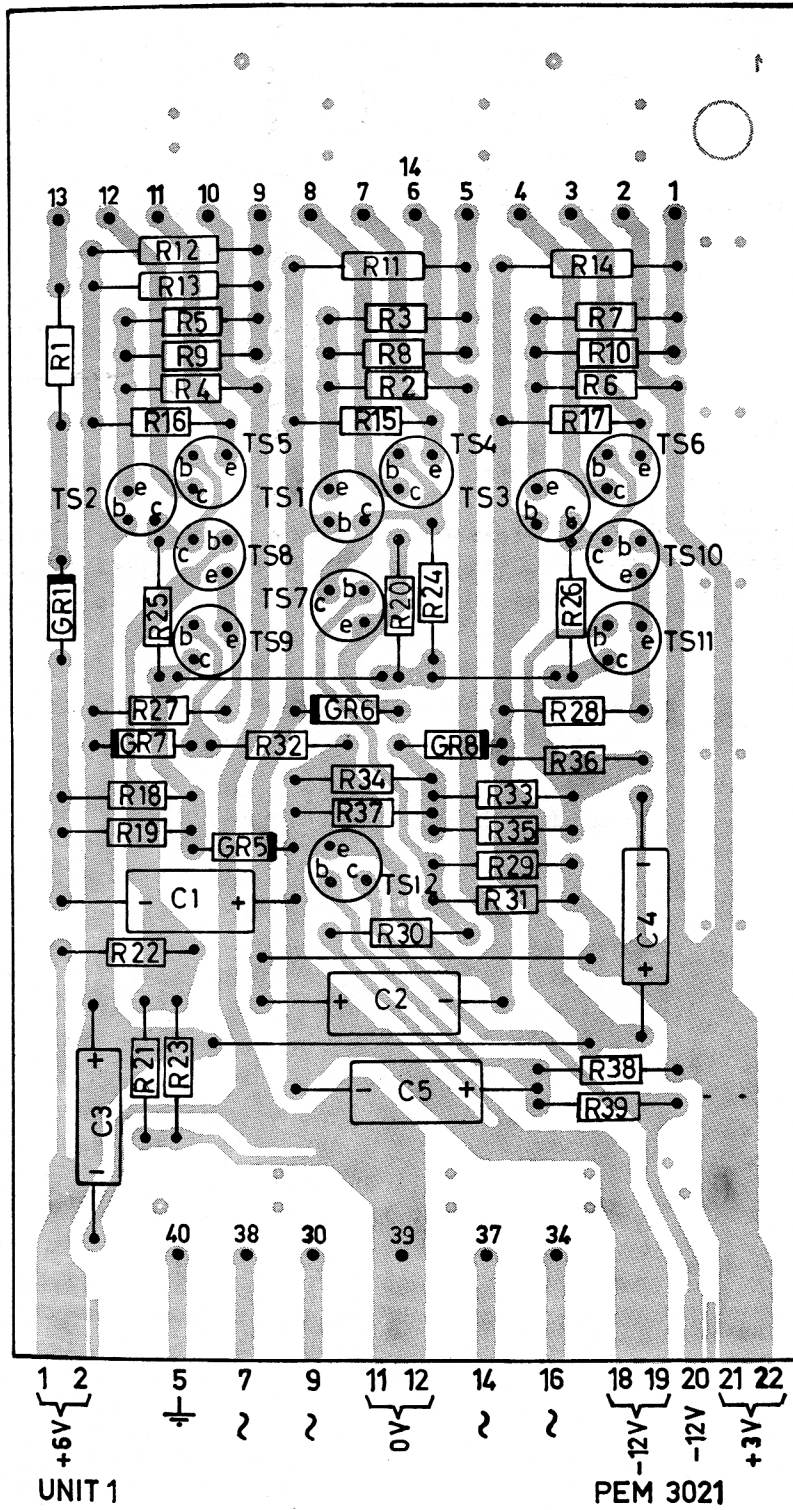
Printed wiring board, Power supply, Unit 1
